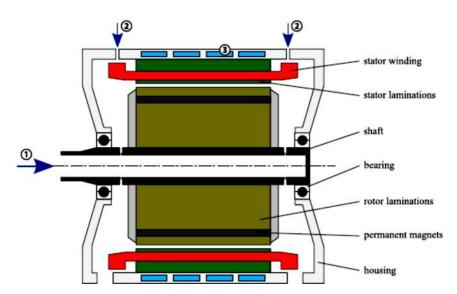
Direct oil injection into the shaft, housing and cooling jacket—schematic [66].
